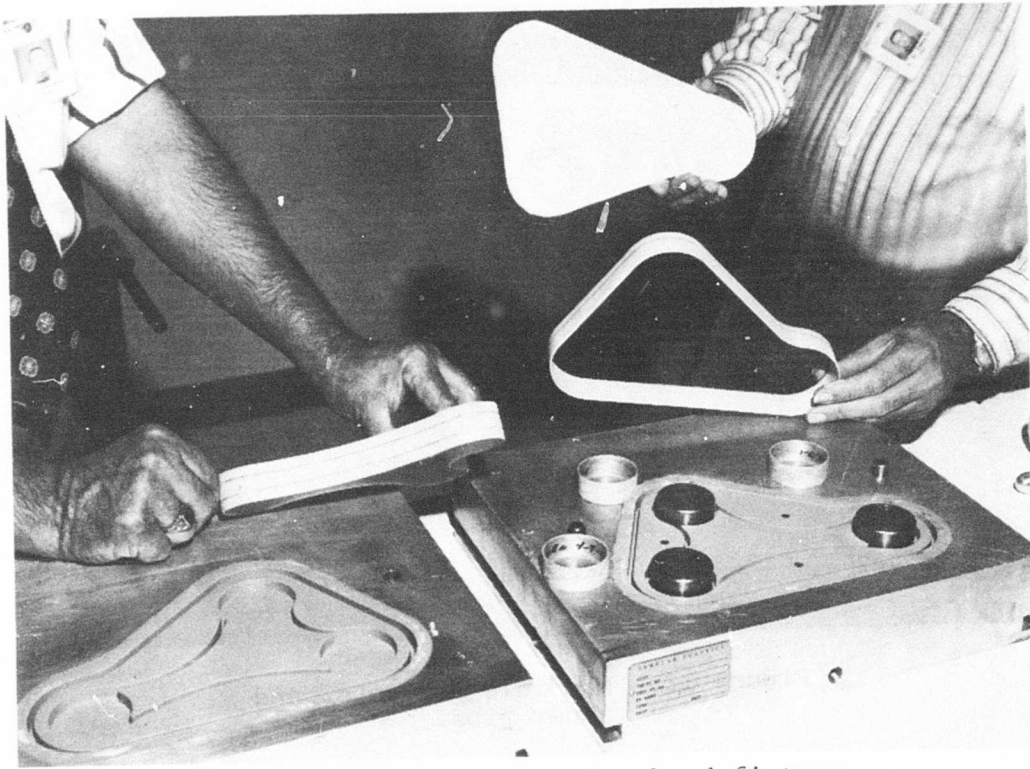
Bellcrank cavity bond fixture with subassembly details.
